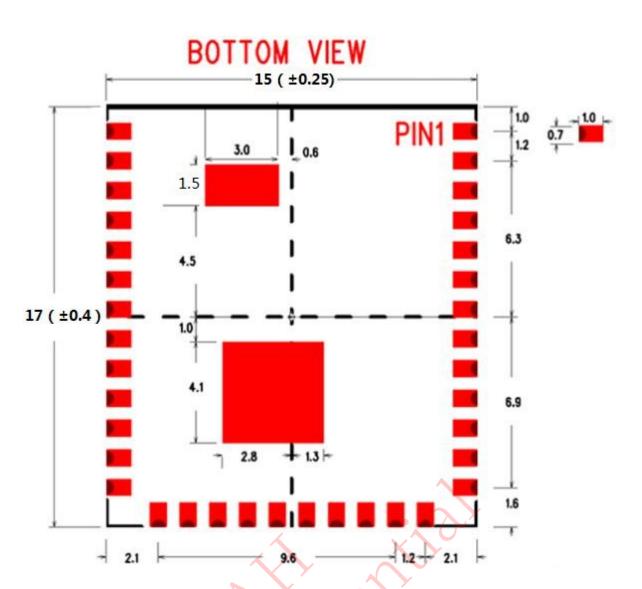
TX-AH-Rx00Pxx Module Bottom View
